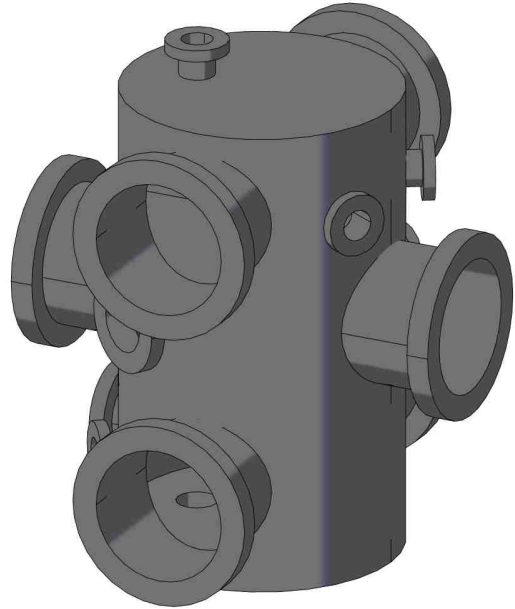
View of the target dump vacuum chamber. The hydrogen jet enters through the upper flange and gets out through the lower hole (visible through the lateral lower flange). All the flanges both for pumps and diagnostics are shown.
